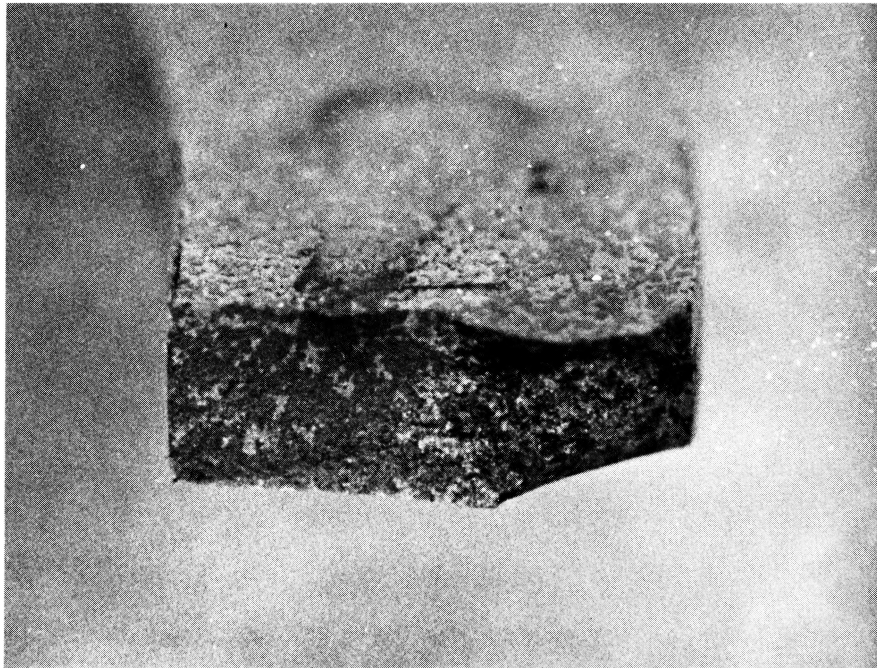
Fracture surface of as received vacuum fretting fatigue specimen 7-59 (2,731,090 cycles).
